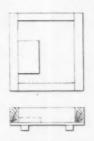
Core frame fitted with bottom board and thickness piece to form pads.
